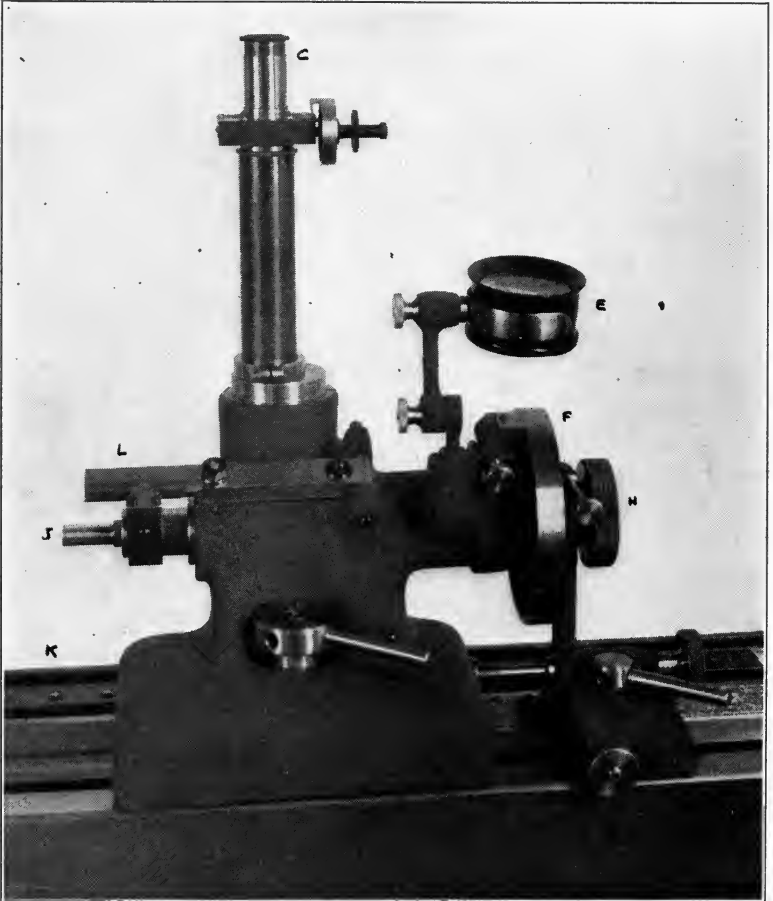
Details of Measuring Head—Pratt and Whitney Measuring Machine
